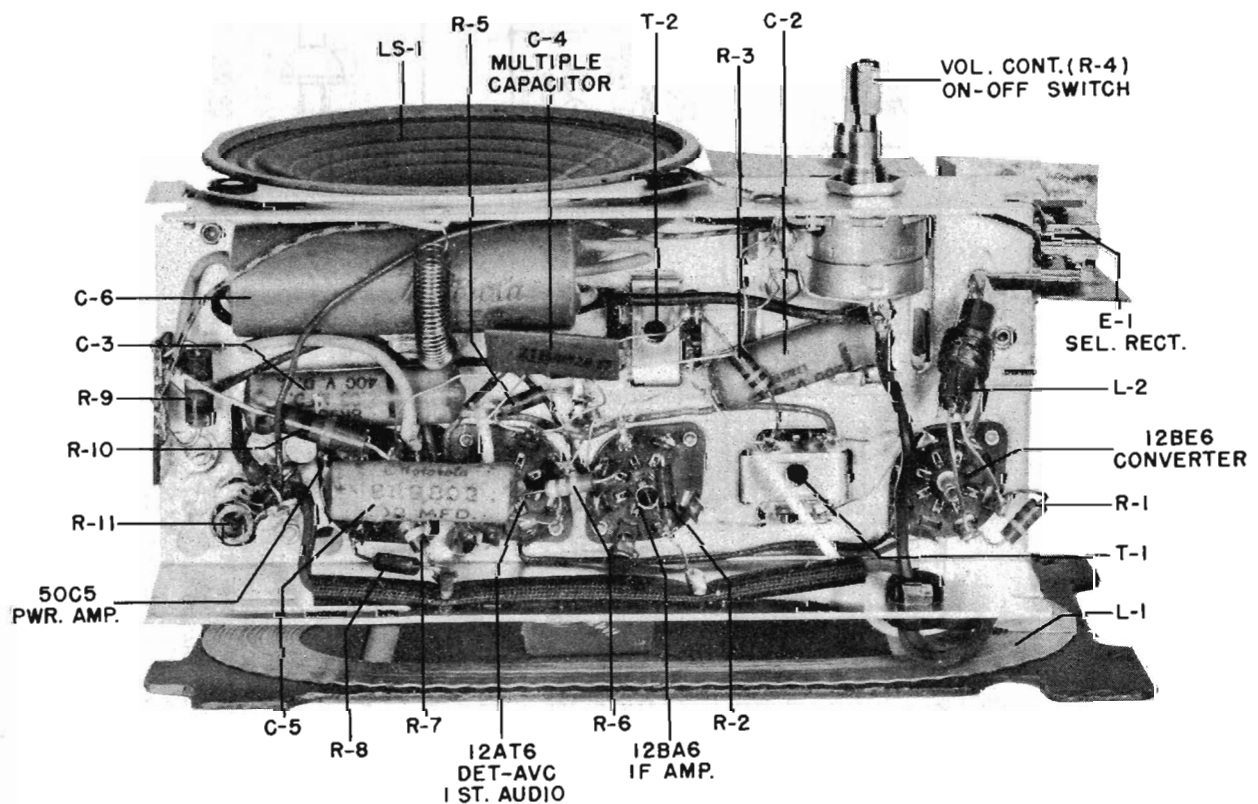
BOTTOM VIEW OF CHASSIS USING MULTIPLE CERAMIC CAPACITOR PLATE
